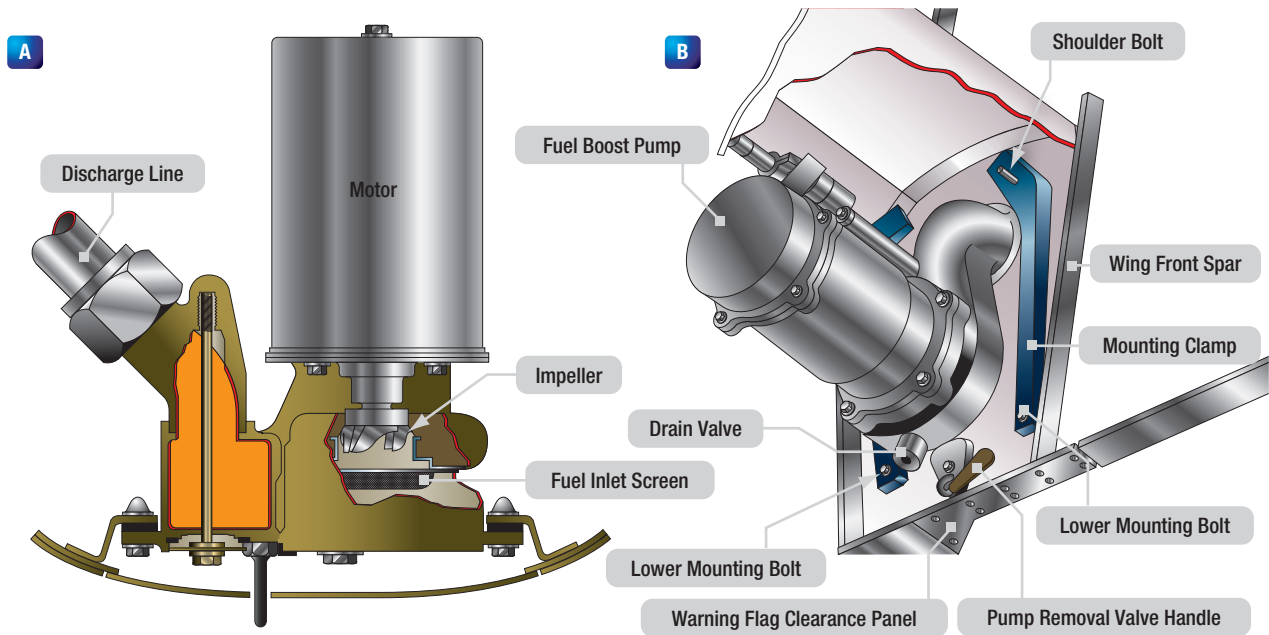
A centrifugal fuel boost pump can be submersed in the fuel tank (A) or can be attached to the outside of the tank with inlet and outlet plumbing extending into the tank (B). The pump removal valve handle extends below the warning flag clearance panel to indicate the pump inlet is closed.
